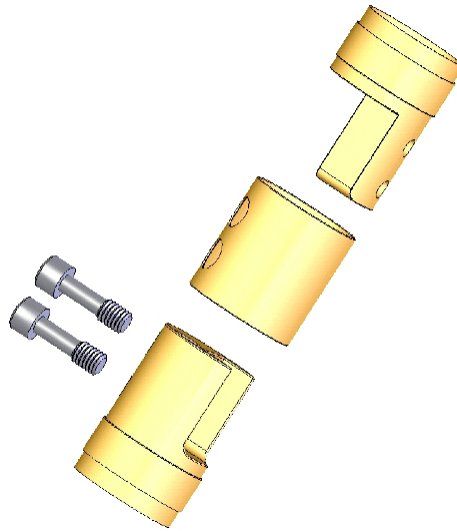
Insertion rod coupler. To assemble, the male and female ends are put together and the screws are tightened. Then the sleeve is rotated over the screw heads so that they cannot back out. These fittings are welded to the 1.5” diameter tubes to create a closed volume.
